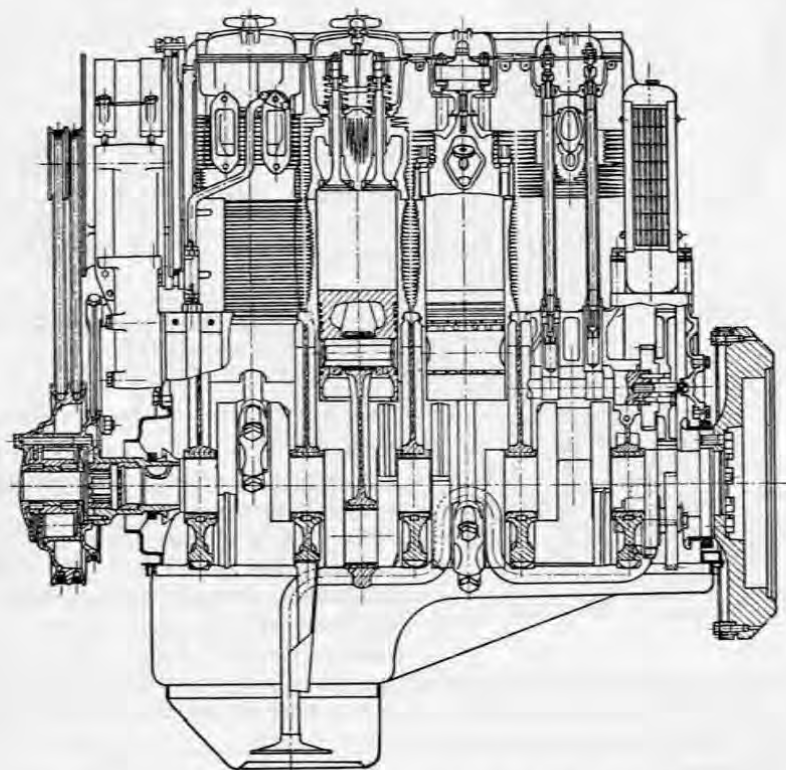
Longitudinal section of the Deutz F-4-L-514 engine.
